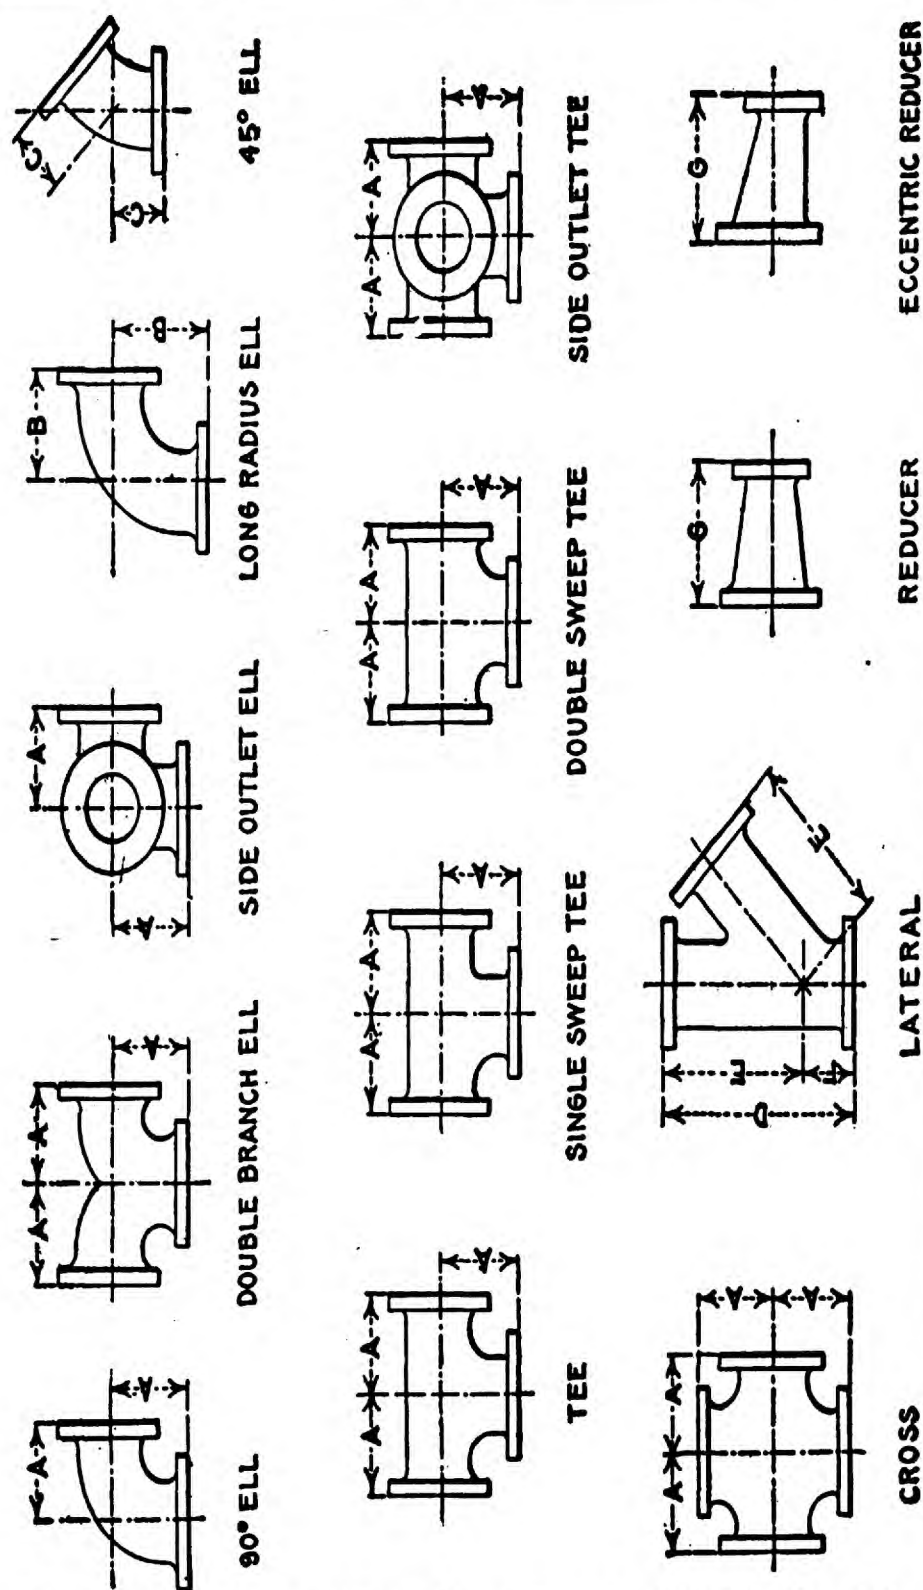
Standard Types of Flange Fittings Dimensioned in Tables 15 and 16.
